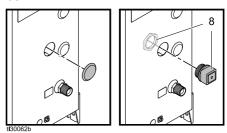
Air Controller Plug, Cable Fitting, and Nut
